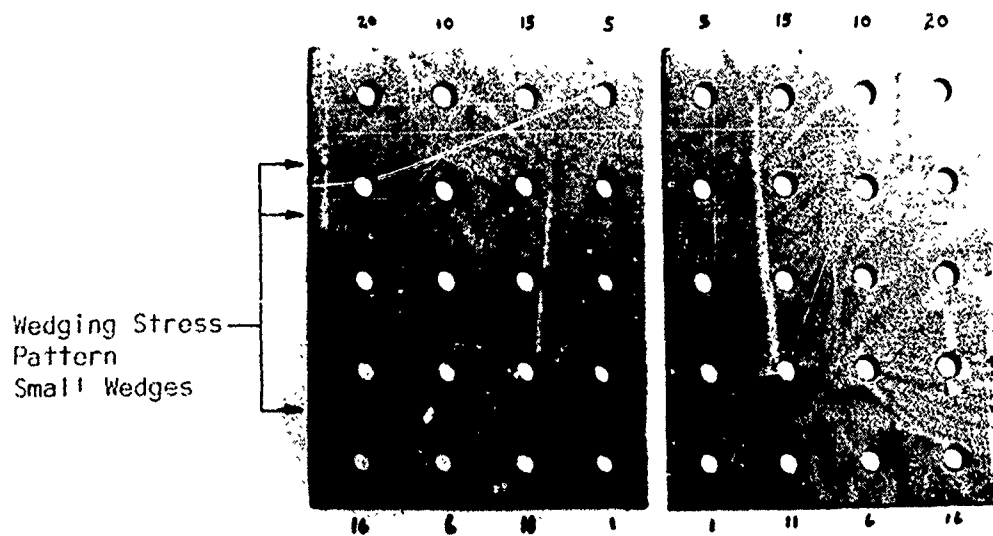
TYPICAL INTERFERENCE FIT FASTENER INSTALLATION SPECIMENS
